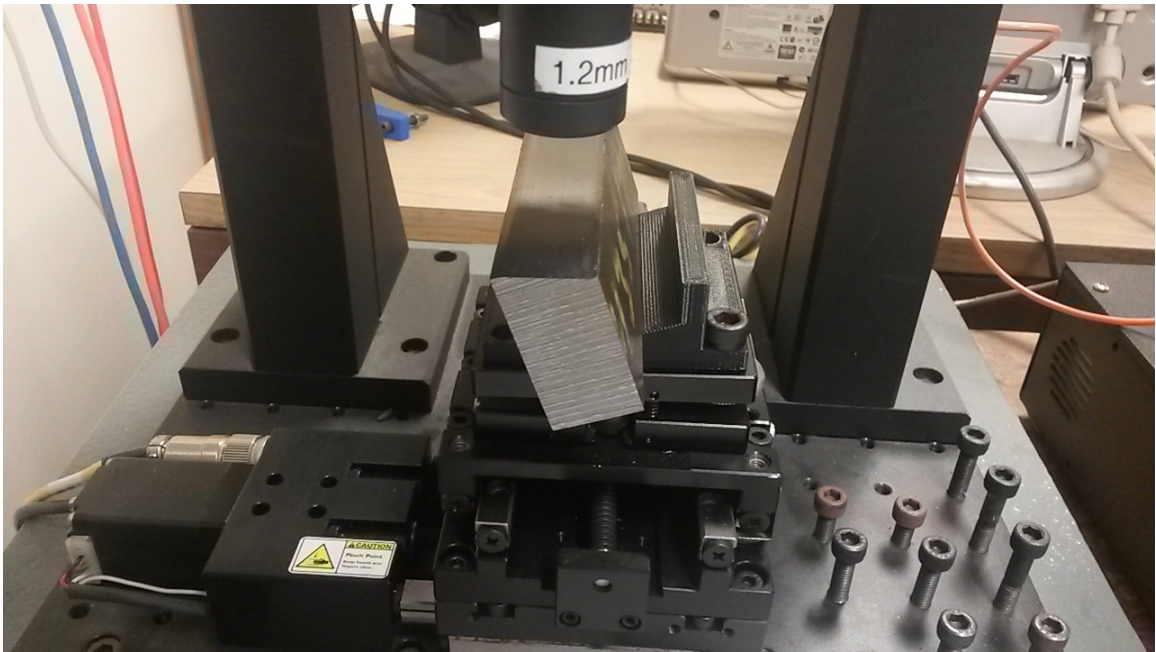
Photograph showing the custom workpiece holder used to scan the workpiece perpendicular to its inclined surface.
